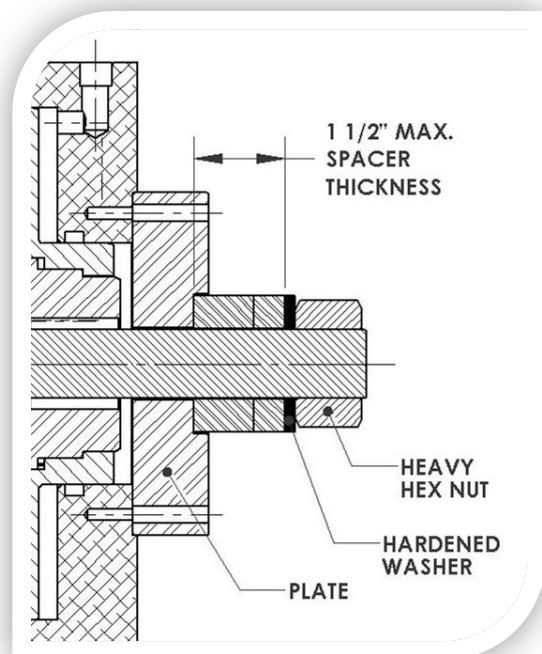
, CROSECTION THRU CALIBRATOR, MAXIMUM SPACER THICKNESS
